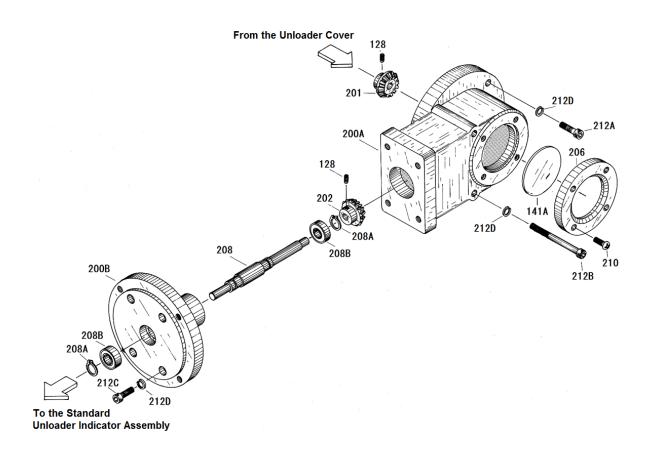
4032C Low-stage Unloader Indicator Fixture Assembly
